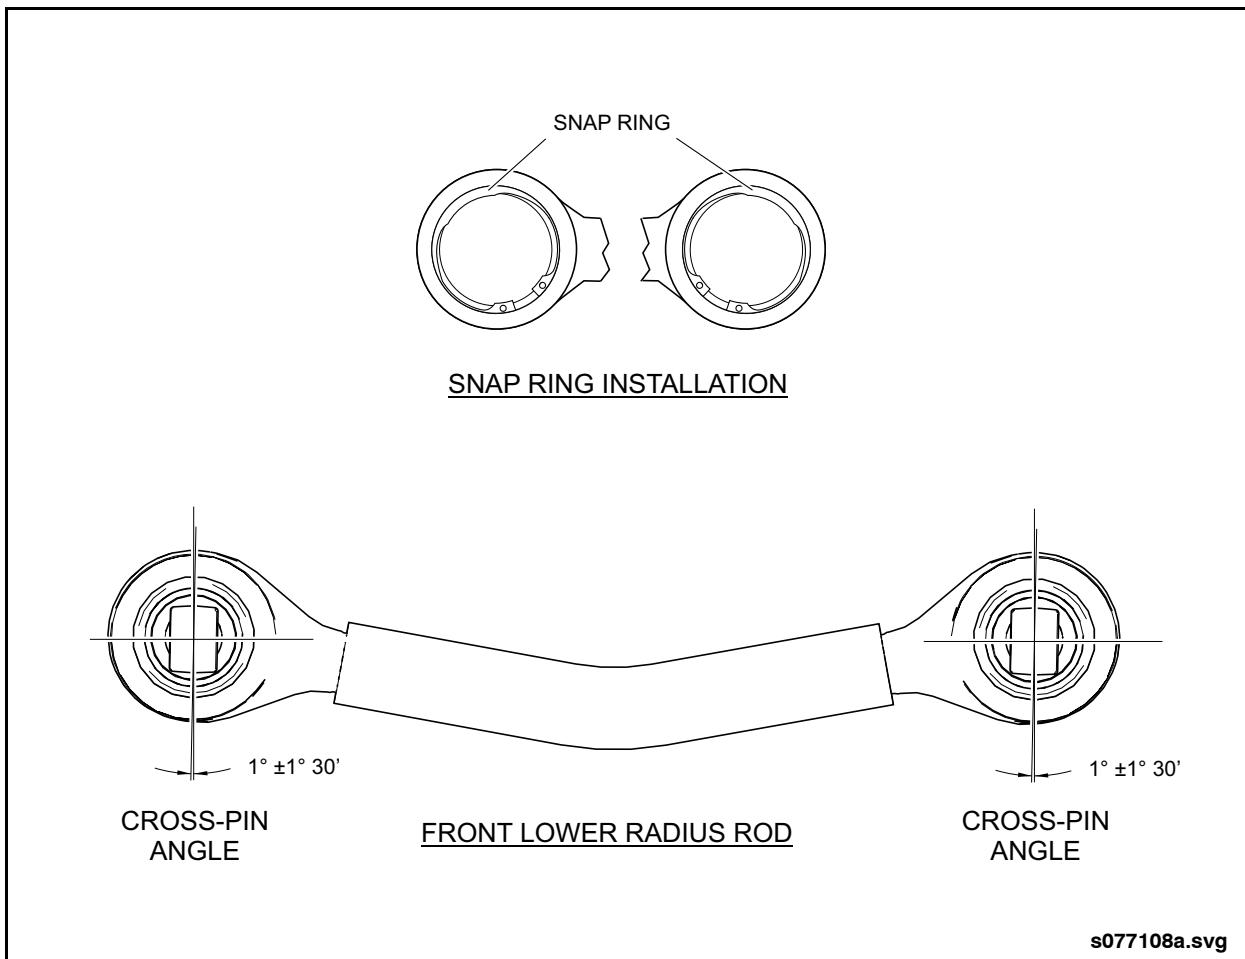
Front Lower Radius Rod Bushing Replacement
